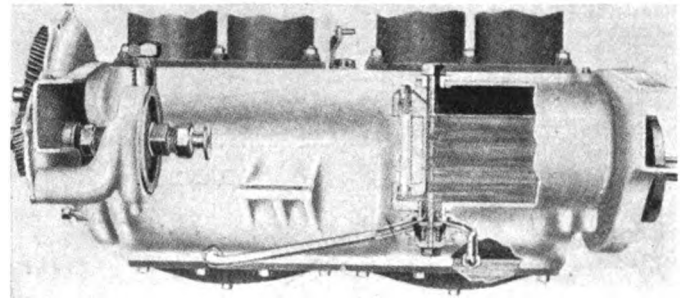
Vacuum oiling system used on 1910 E. M. F.
